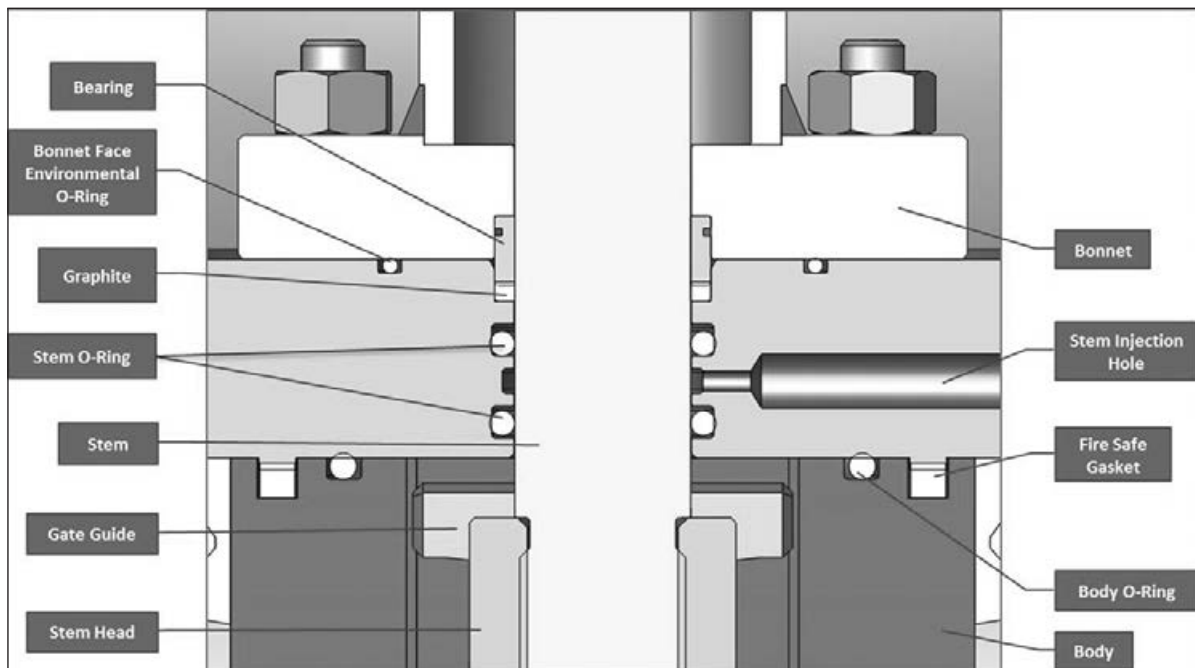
Stem and body to bonnet sealing arrangement design, stem guiding system and emergency seal injection point
